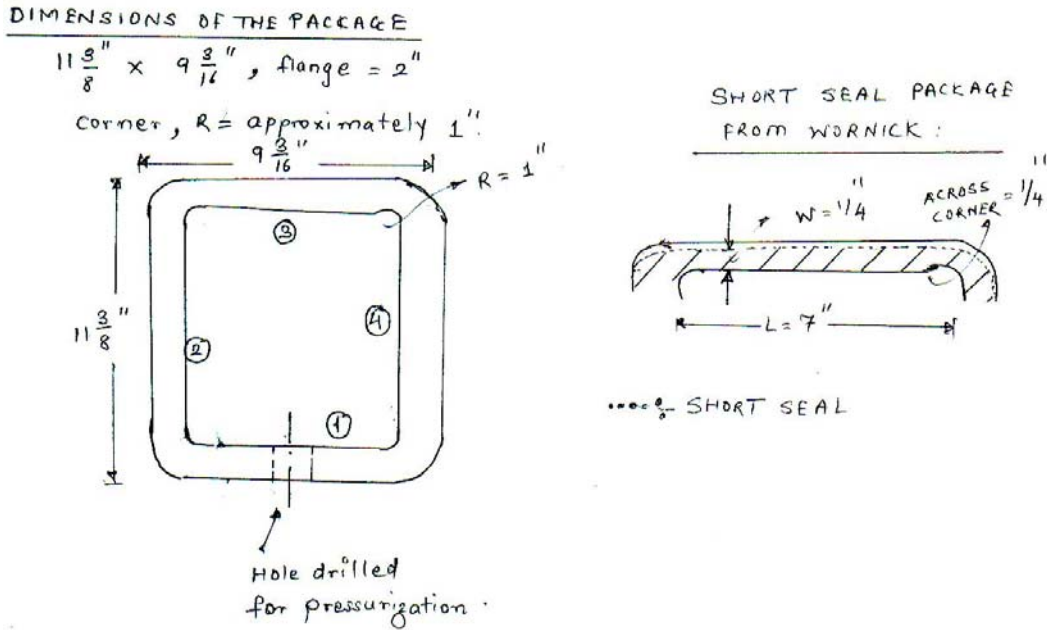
Schematic drawing of a defective tray with a short seal from Wornick.
